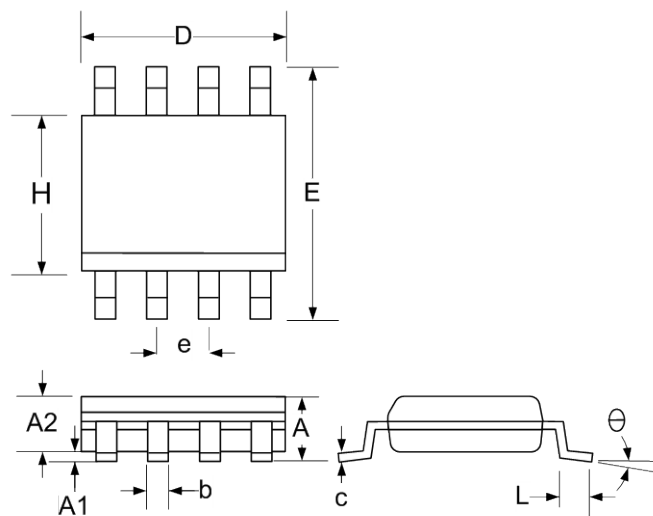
• Y 8-Pin CERDIP Package Dimensions
